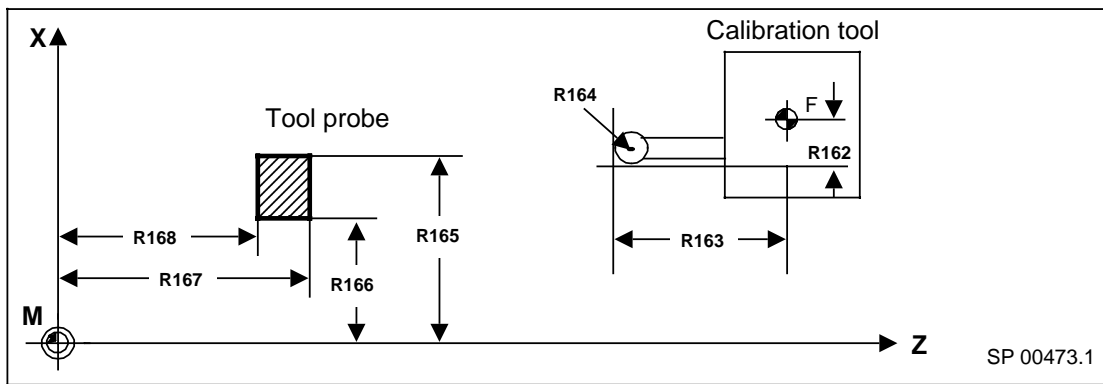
Overview MDC: Tool probe: Calibration tool
